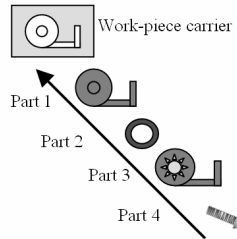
Assembly of an Adhesive Tape Dispenser
